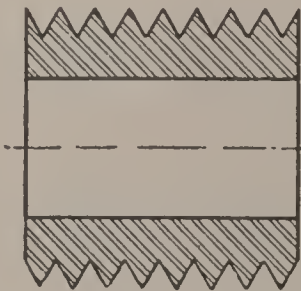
Conventional Drawing for Threads in Sectional Pieces
